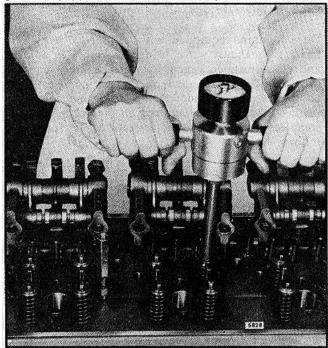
Checking Pressure Required to Open the Exhaust Valve in Cylinder Head
